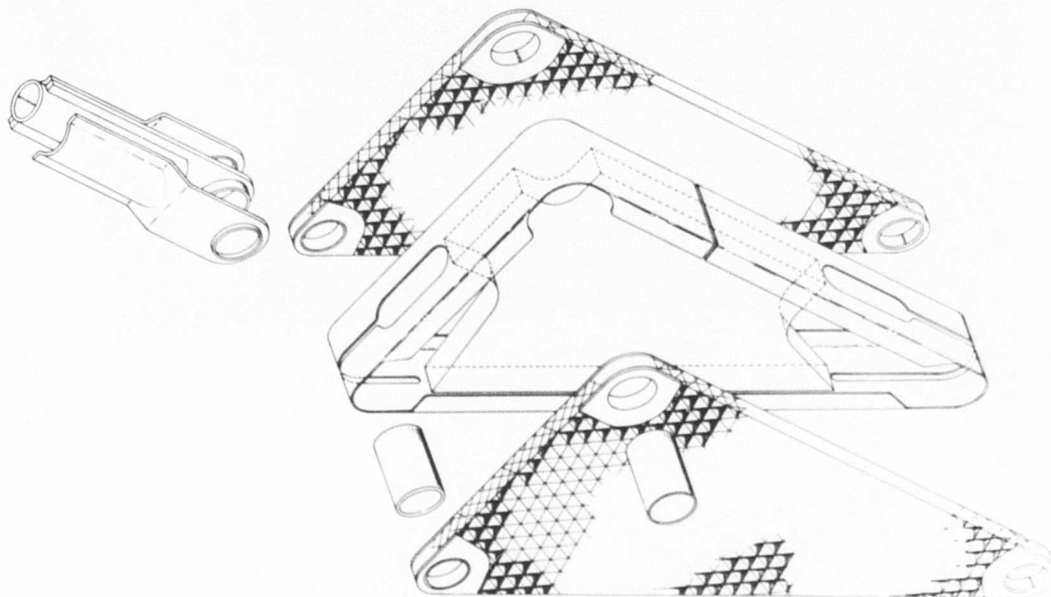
Exploded View of "Tetra-Core" Bell Crank.
